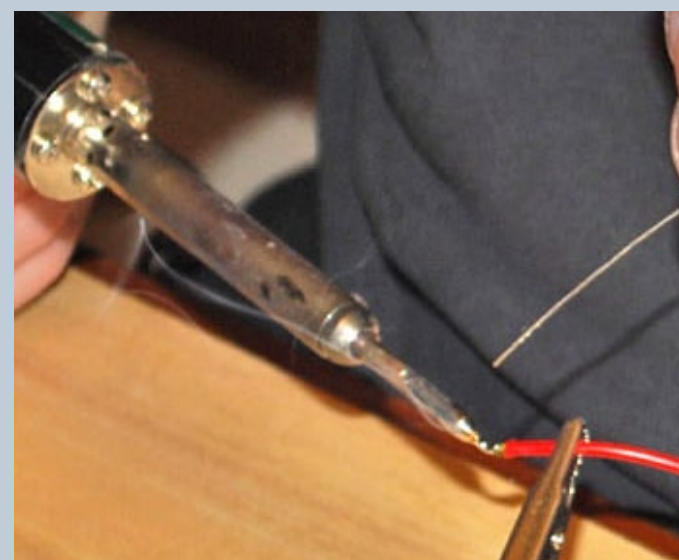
Figure C: Pre-tinning the wires with solder before joining promotes a quick, strong solder joint.
